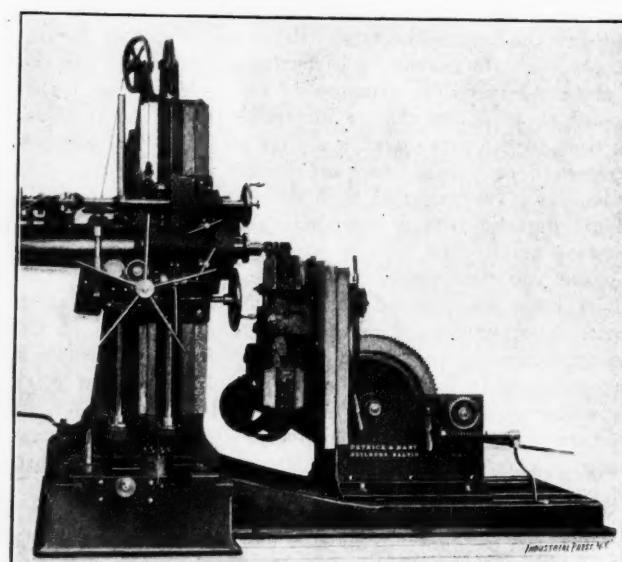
Horizontal Boring, Drilling and Milling Machine.
